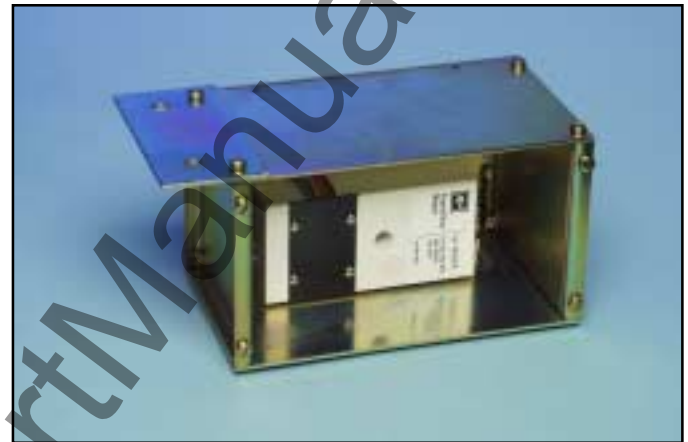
Trip Unit Mounting Bracket Mounted to the Trip Unit Box.
